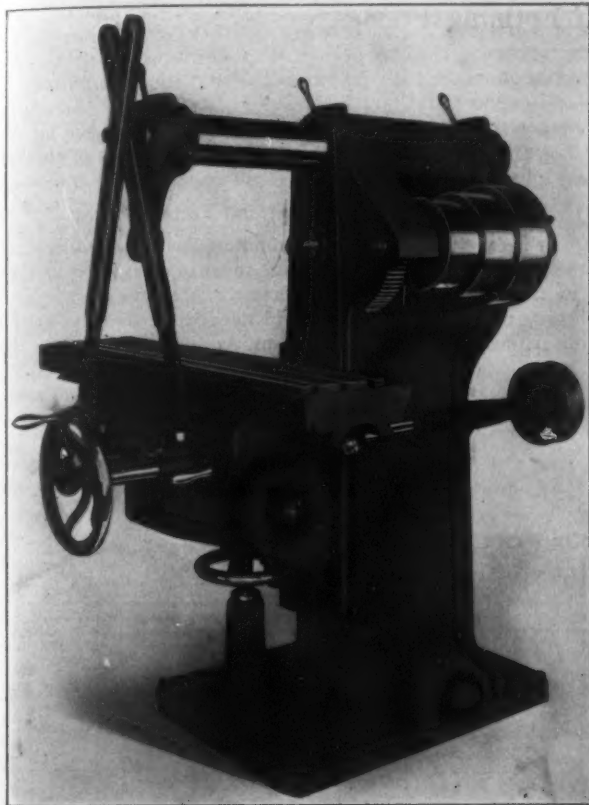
The Garvin No. 22 Plain Milling Machine.
